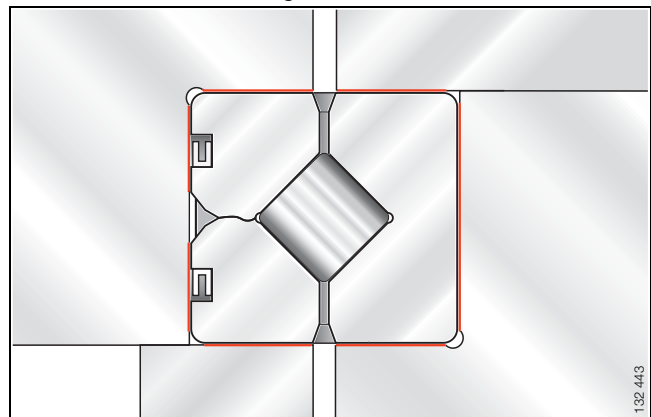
· Uniform support of bearing rings by the adjacent construction – example: crossed roller bearing SX
